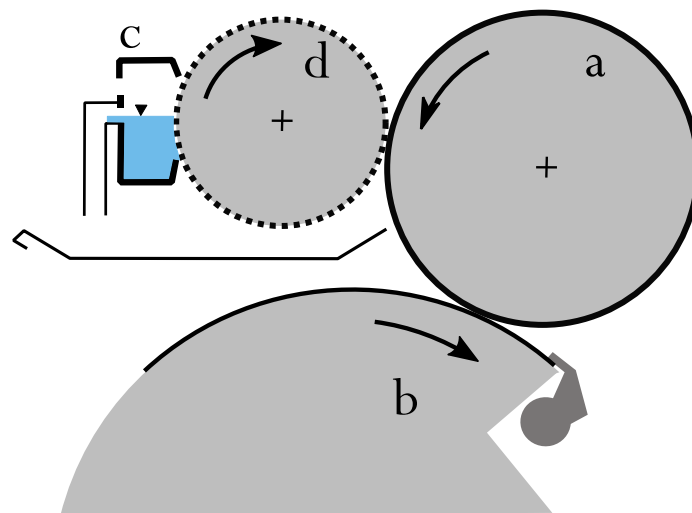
Schematic of a possible flexo printing unit with a chambered doctor blade in a sheet-fed printing machine after Neumann (2009): Coating unit with chambered doctor blade, a) plate cylinder with printing plate, b) impression cylinder with engaged substrate, c) ink fountain and d) anilox roller.
